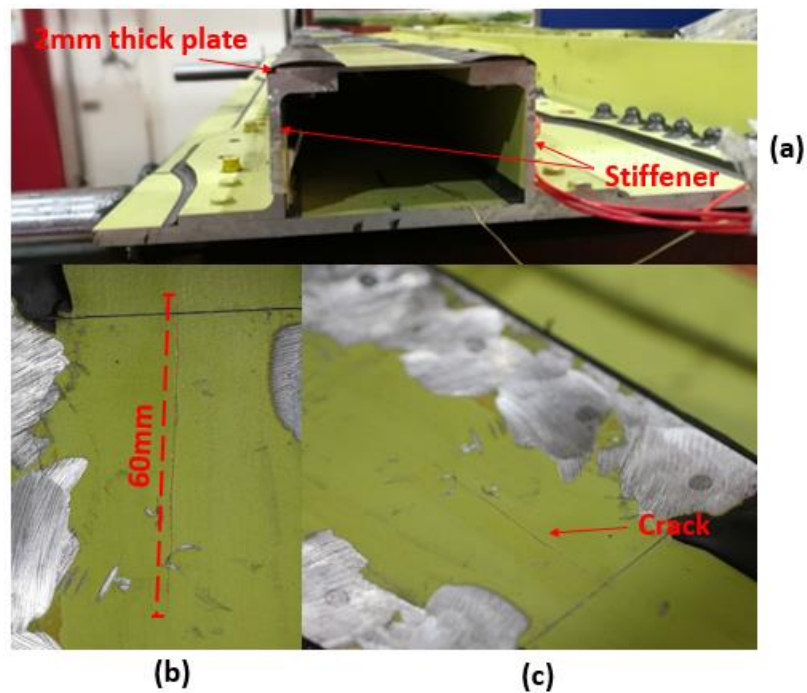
Image of plate connecting two stringers (a) and images of crack on plate (b) and (c).
